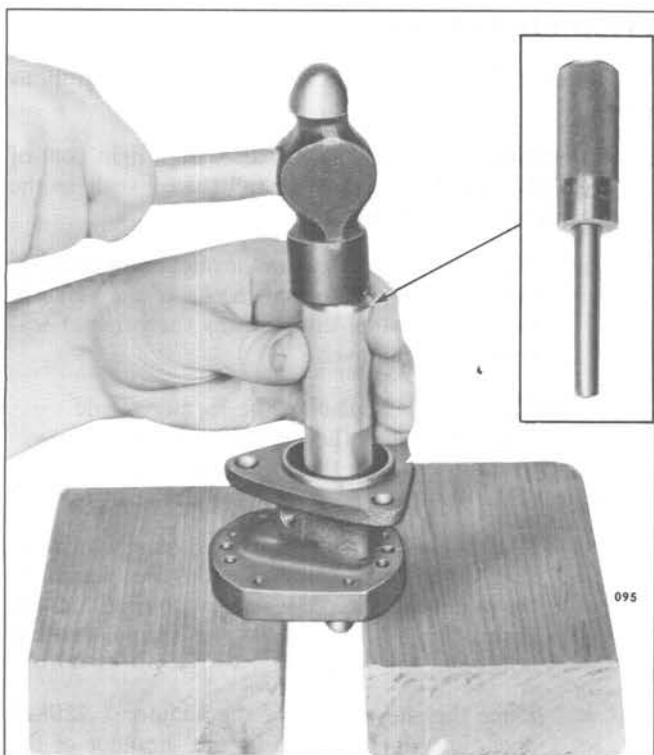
Installing Inner Oil Seal using Tool J 1508-8
